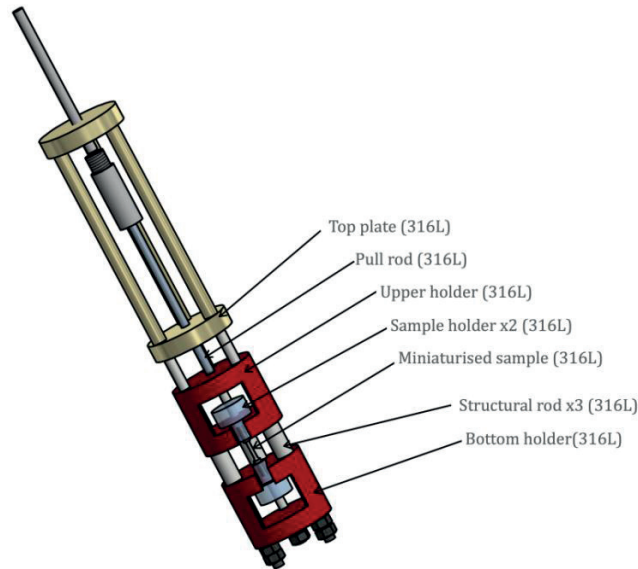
Assembly of the components designed for the SSRT machine with Autodesk Inventor.
